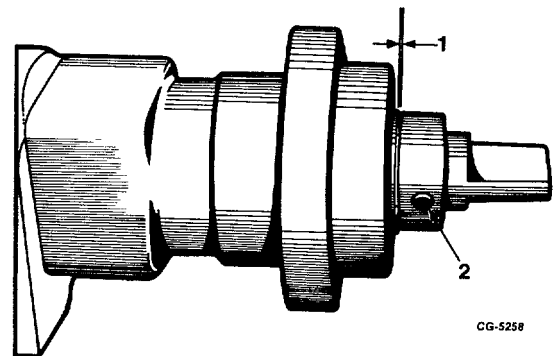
Checking Distributor Shaft End Play (Thrust Washer-to-Gear Clearance) (Typical)
